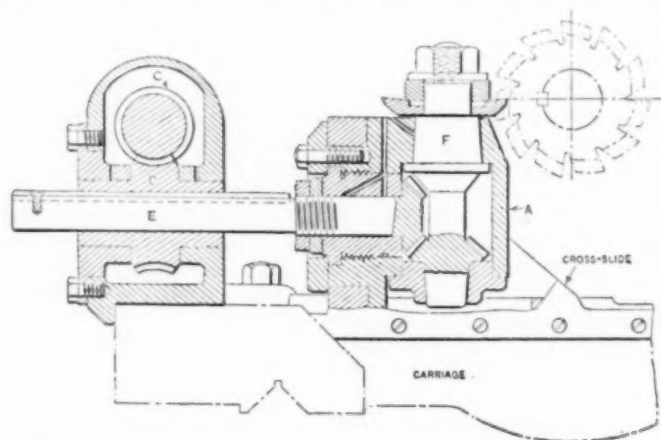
CROSS-SECTIONAL VIEW THROUGH THE CUTTER HEAD AND DRIVING UNIT OF THE SPECIAL GENERATING ATTACHMENT
